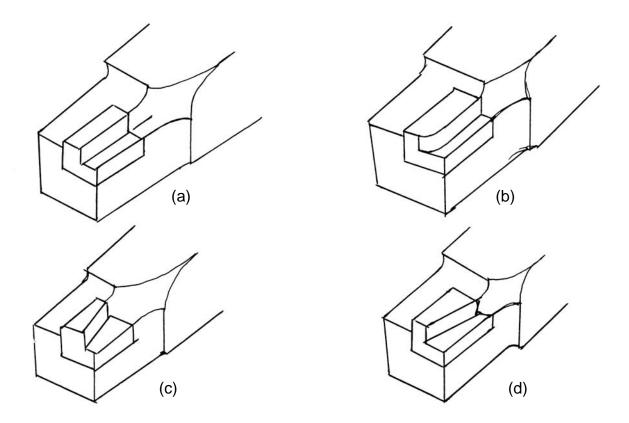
Step type in-built chip breaker (a) parallel step (b) parallel and radiused (c) positive angular (d) negative angular
